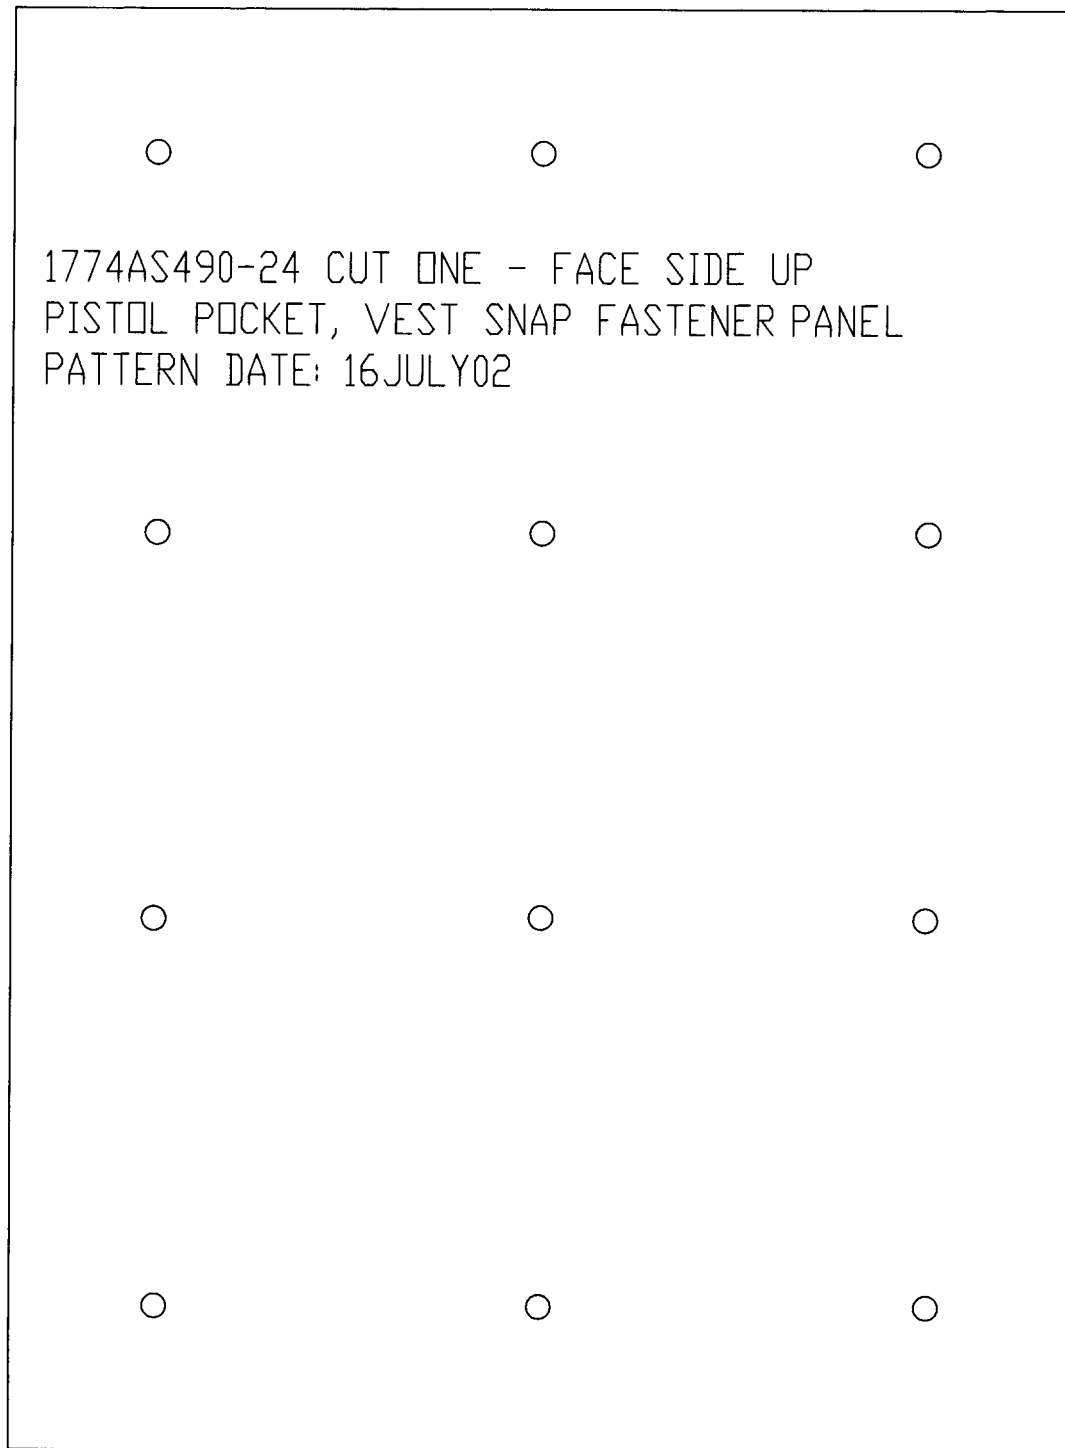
F. Pistol Pocket Vest Snap Fastener Pattern
